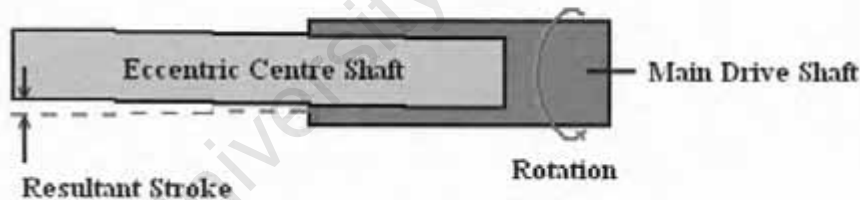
Concept L_a2 — Eccentricity adjusted centre shaft
